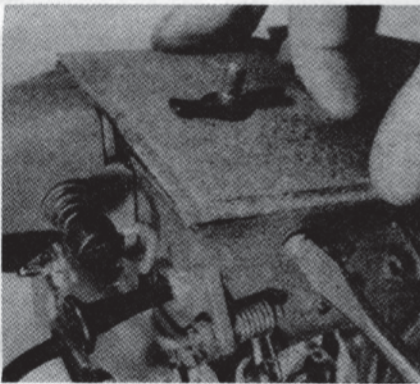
Before tightening screws retaining air filter bracket (19—Fig. HL92) in throttle handle, place air filter element on bracket stud and align filter with edges of air box.
